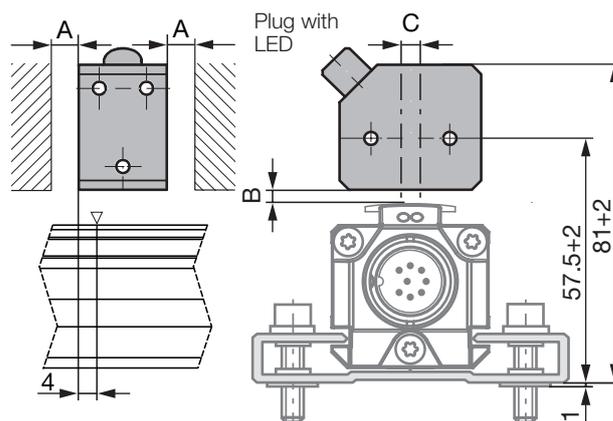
Dimensions and distances with BTL5-P-4500-1 electromagnet (24 V/100 mA)
